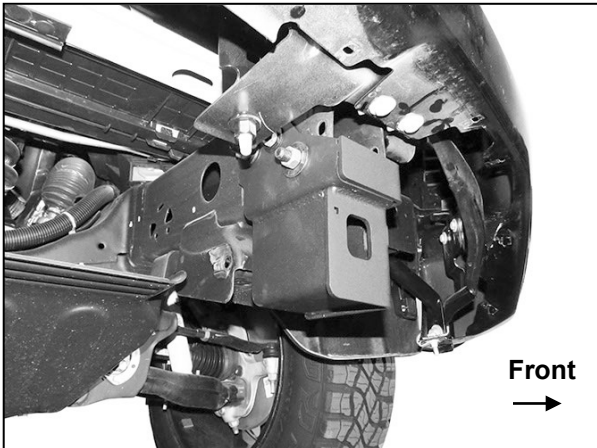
Insert (1) Left and (1) Right 12mm/10mm Bolt Plate into end of frame and out through driver/left Mounting Bracket
